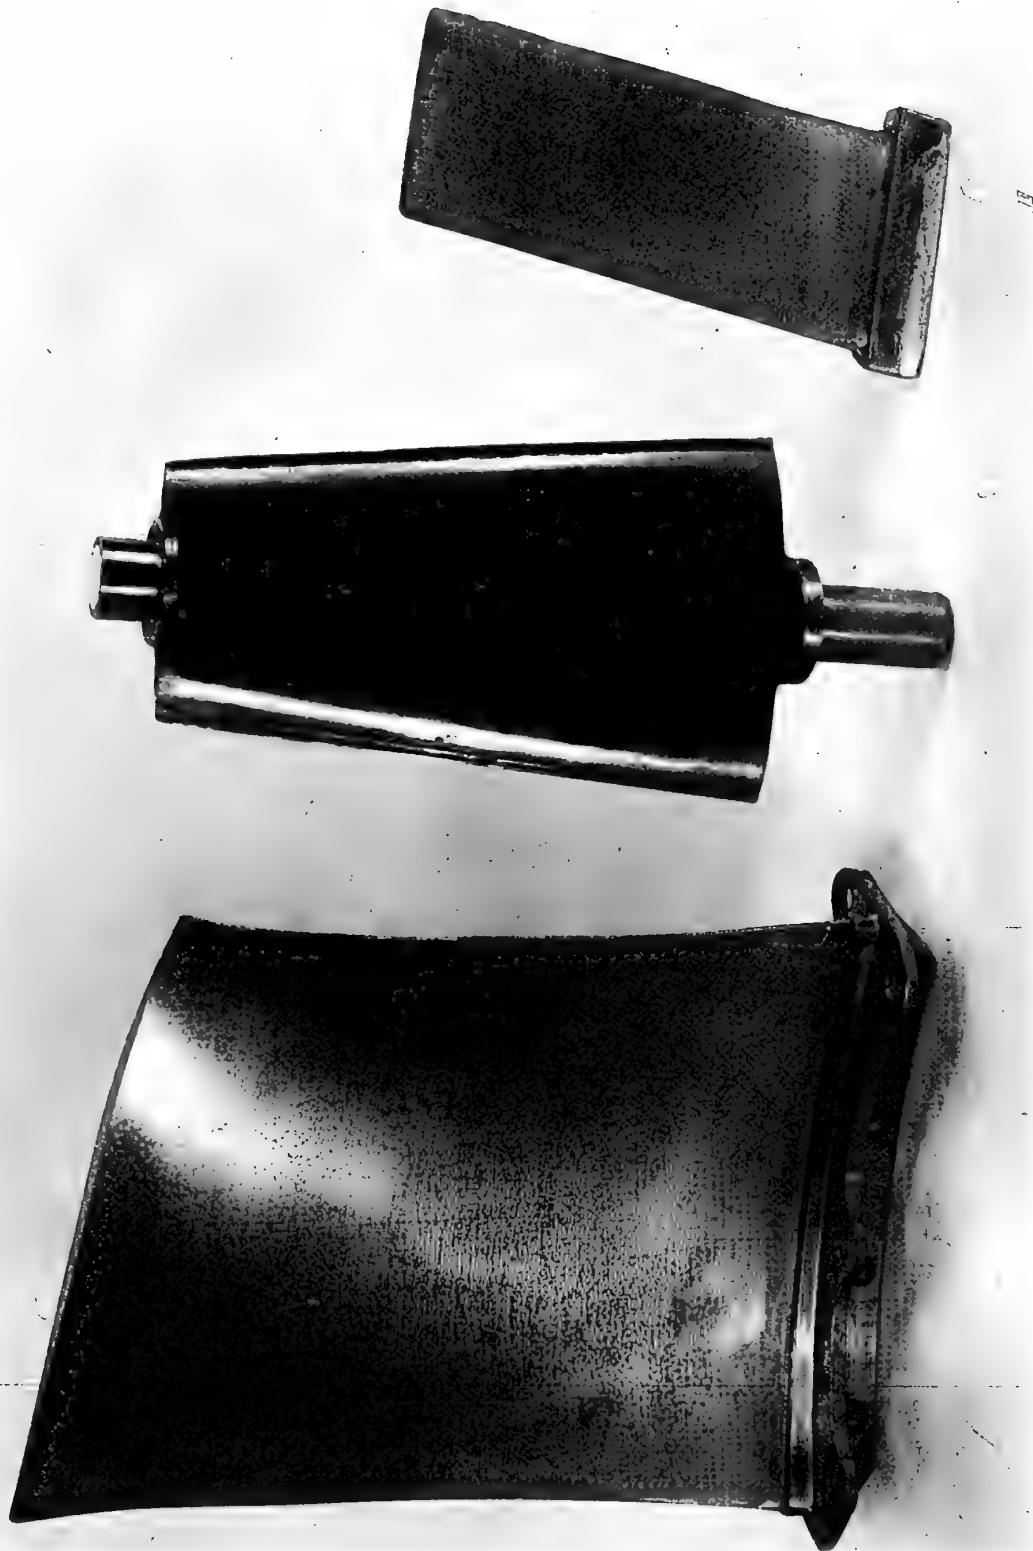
General view of aeroengine compressor blades manufactured from boron-aluminum composite by diffusion bonding
